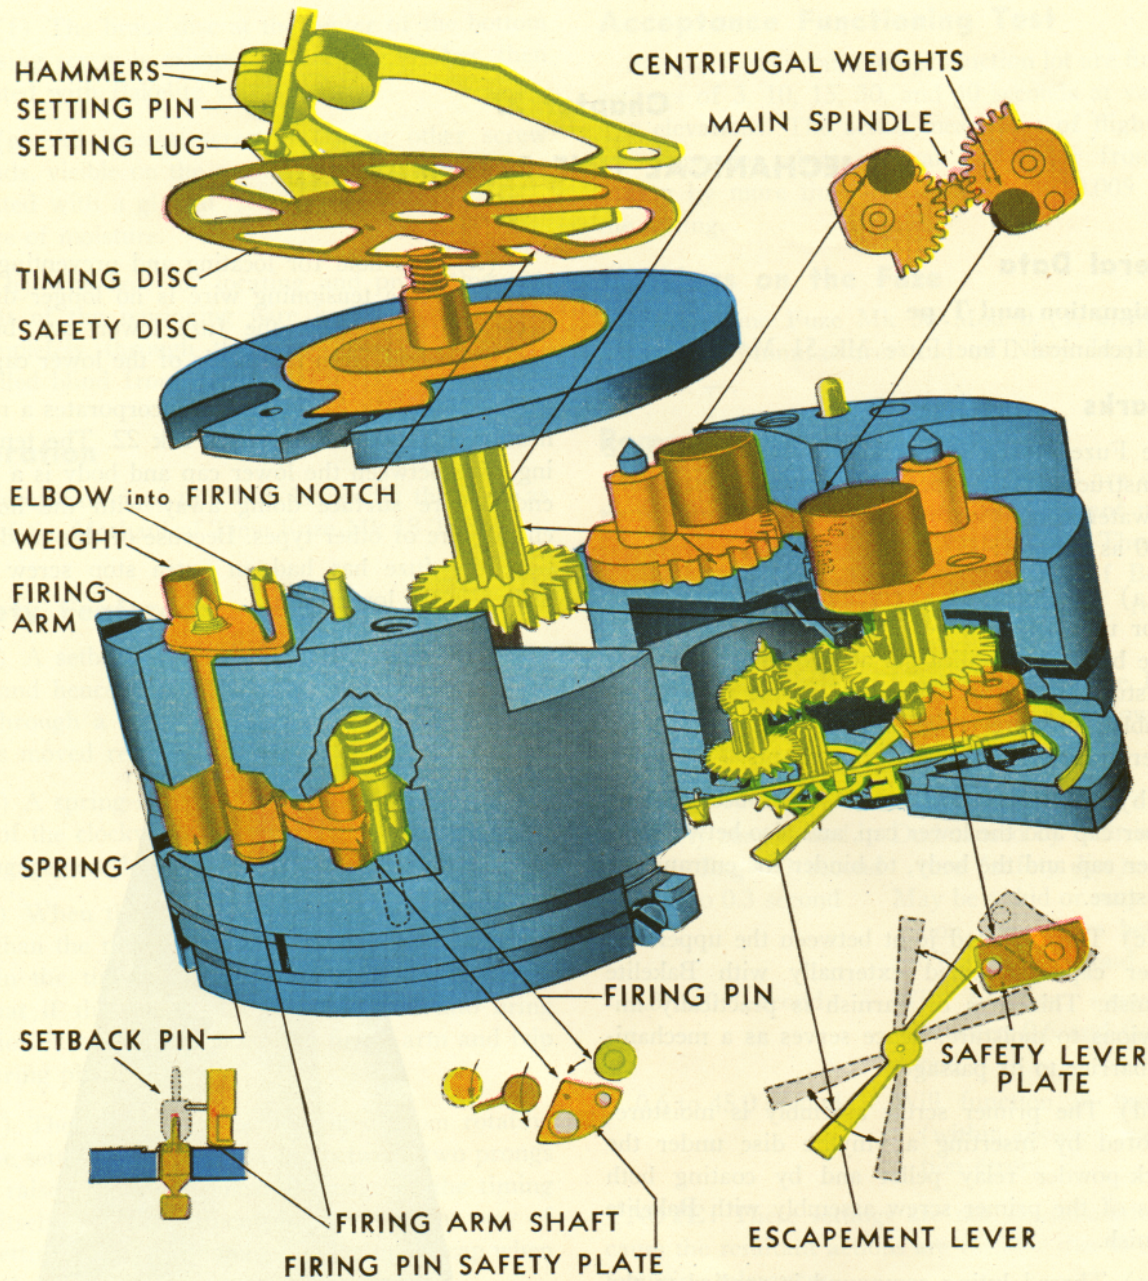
Mechanical Time Fuze Mk 51—Sectional View
